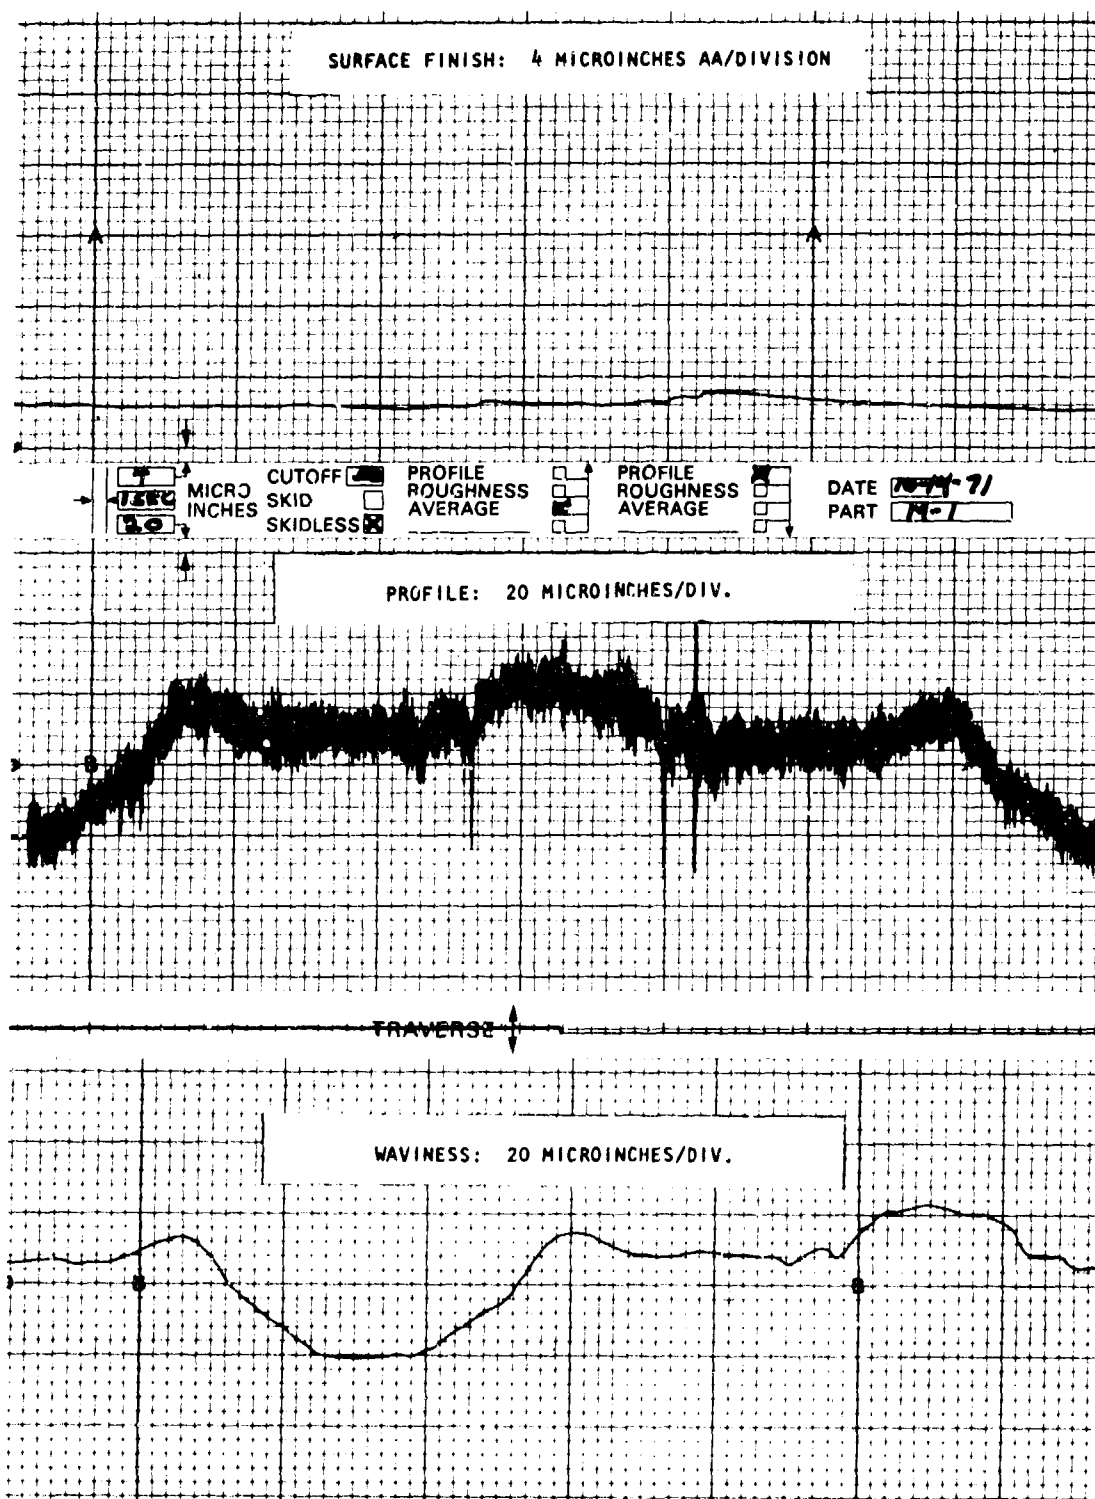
Profilometer traces showing profile, surface finish and waviness on gun drilled tube M-1.
